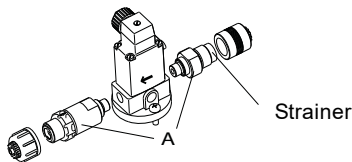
Solenoid valve OCD-162-30, -60: exploded view
